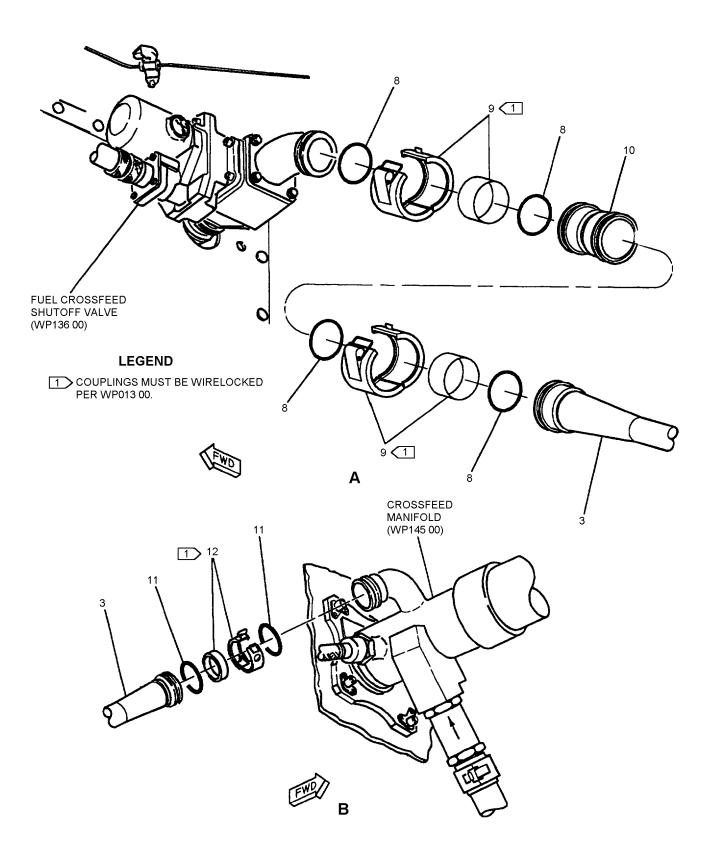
Fuel Crossfeed Tube Using Idler (Sheet 2)
